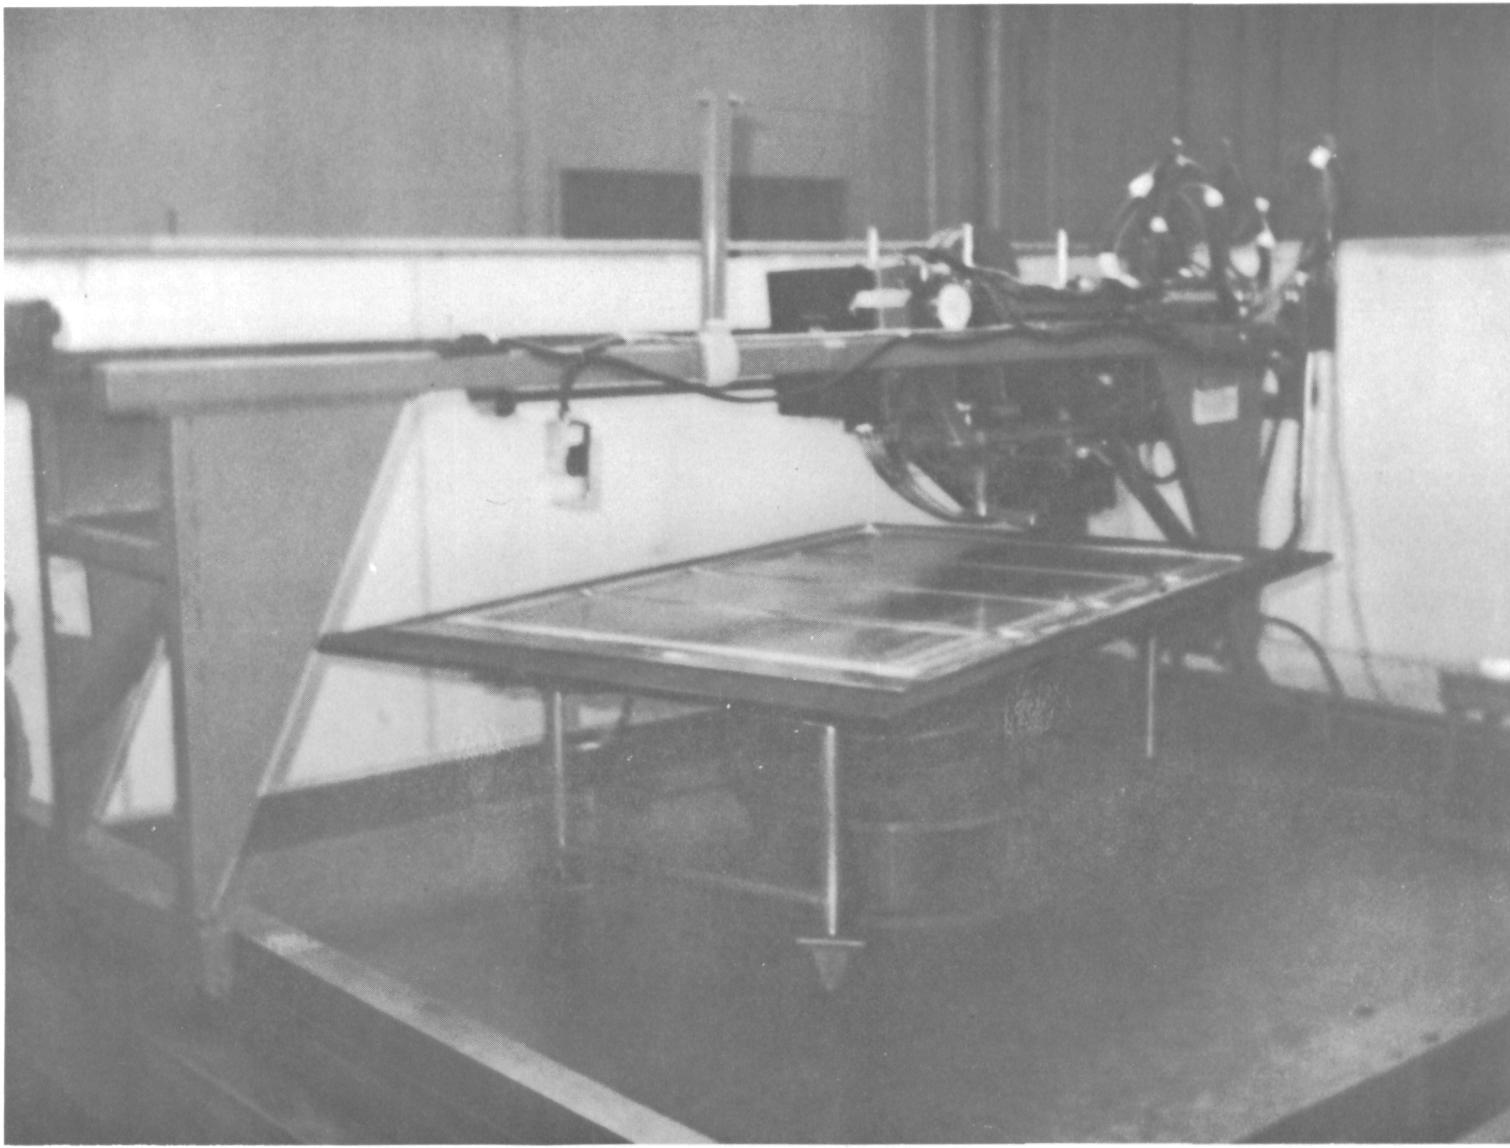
Positioning of Steel Tool on Tape-Layup Machine
